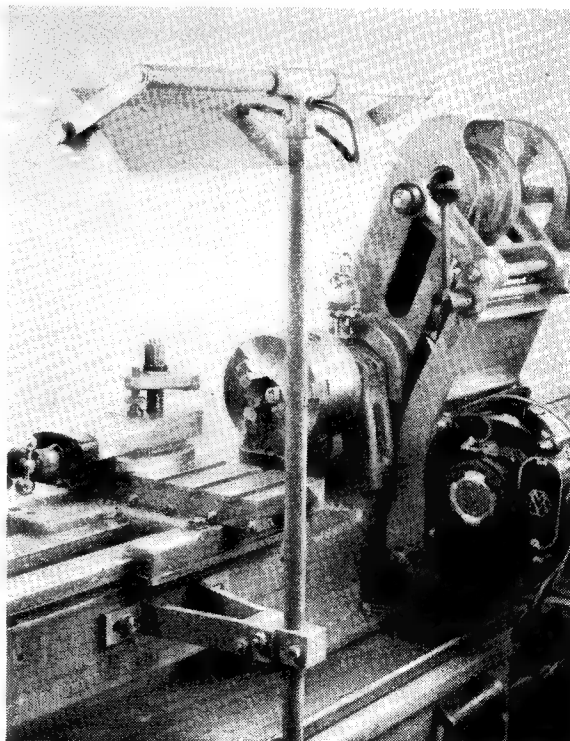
Showing the method of attaching the pillar to the lathe bed
